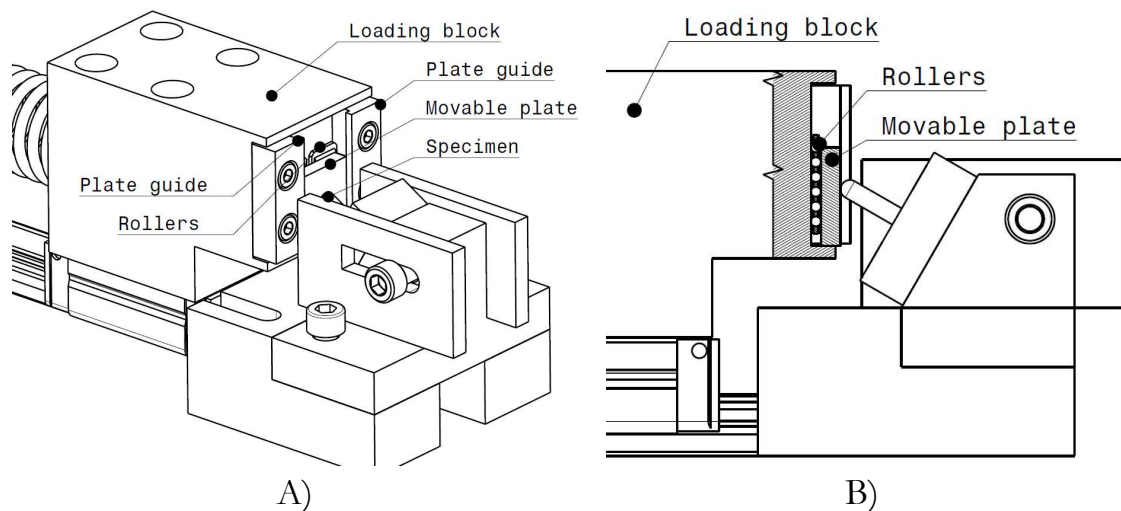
A, Loading block with the removable plate in contact with the specimen. B, Detailed view of the removable plate and the rollers.
